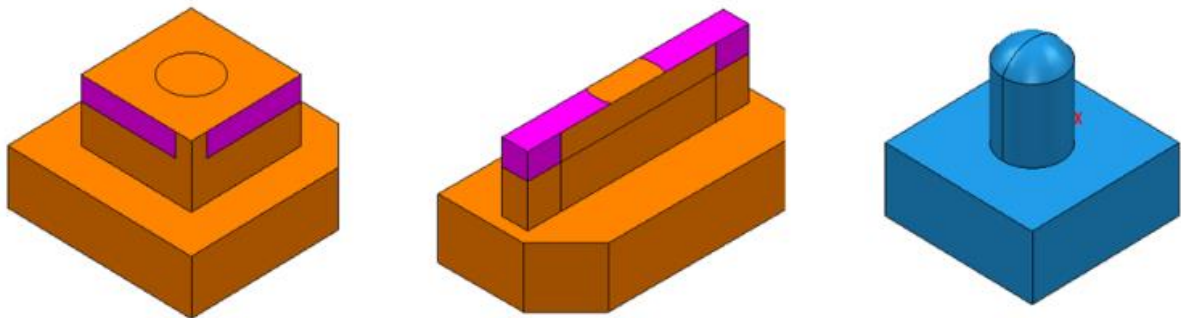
Three different shapes of the electrode used for machining the shape of the cavity.
